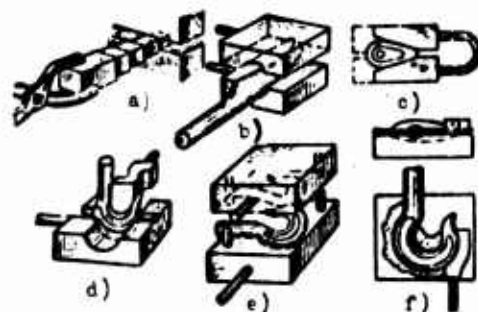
Technological process of manufacture of forging of a hook [31]: a) stretching of the end into a cone; b) rolling of the end into a conical swage, burnishing of the cylindrical end in a separate swage; c) transverse pressing of the blank into a wedge-shaped section; d) bending with the help of the bottom part and a semi-circular cover plate; e) stamping in an underlaid die, f) removal of a projecting edge with the help of a bent square.
